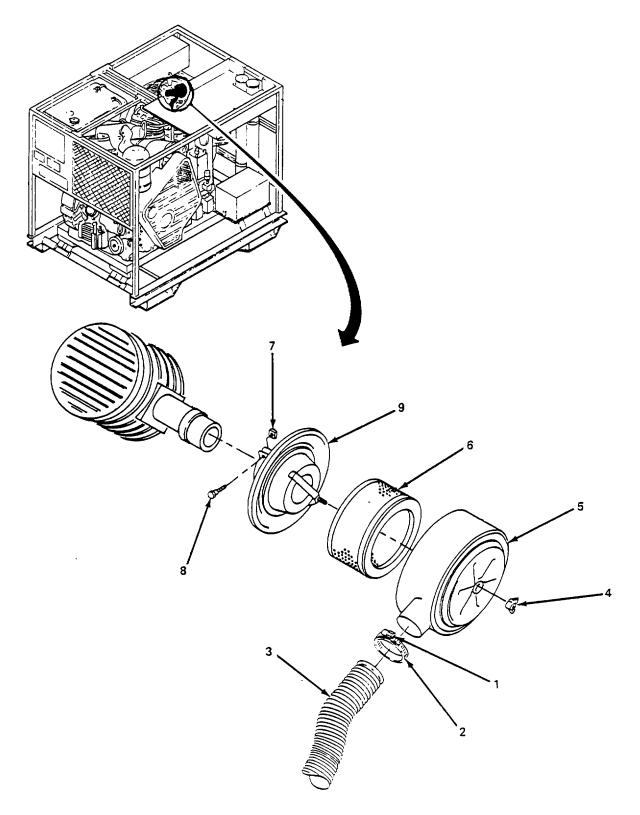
Compressor Air Intake Filter Assembly, Replace.
